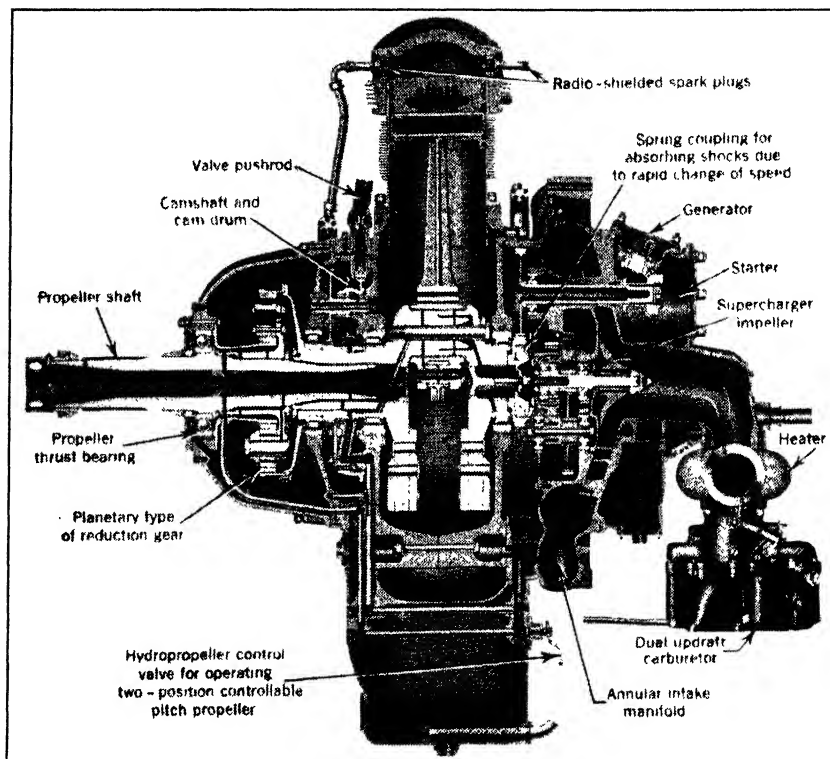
Side sectional view of Wasp air-cooled radial airplane engine.
